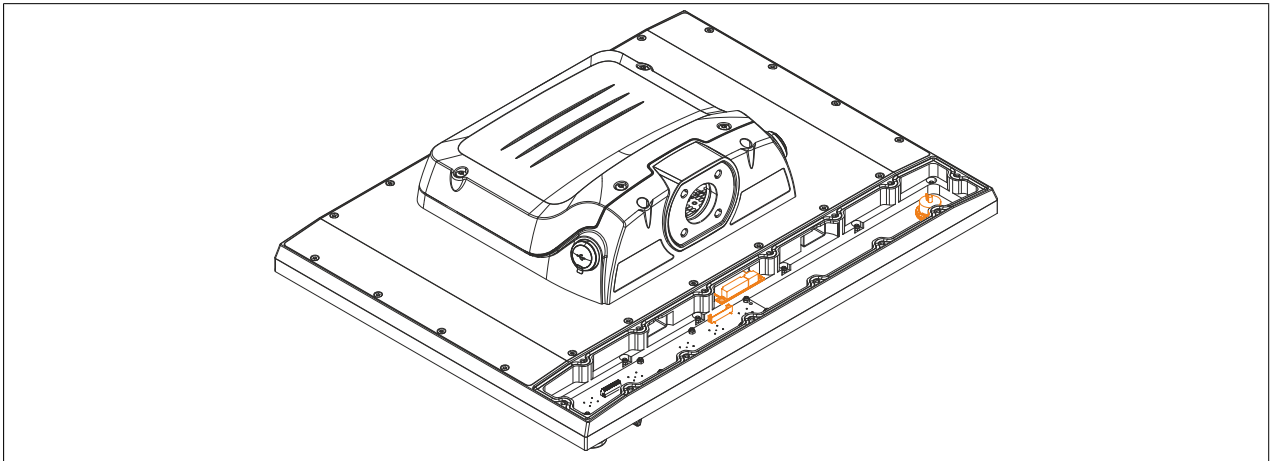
Connecting the cables for the expansion unit to the panel's circuit board
